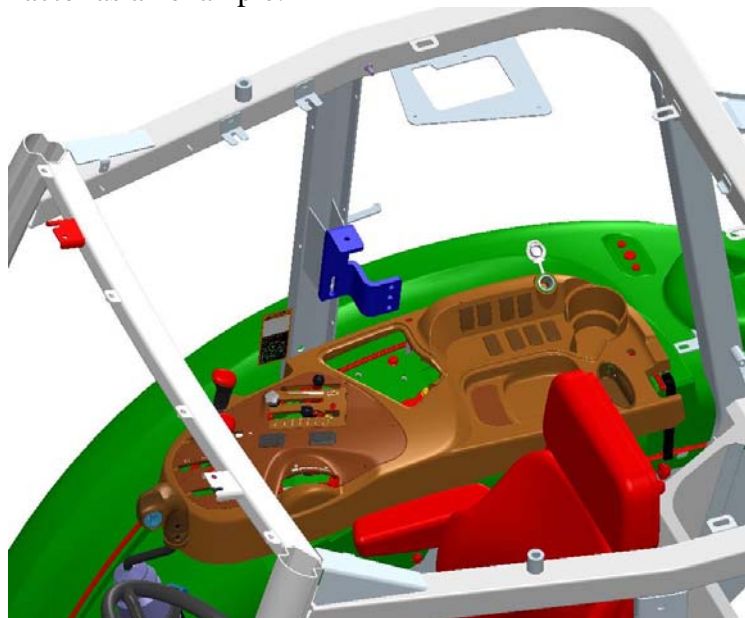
Preferred Mounting Location of JD056001 Bracket in a 5M-Series Cab
